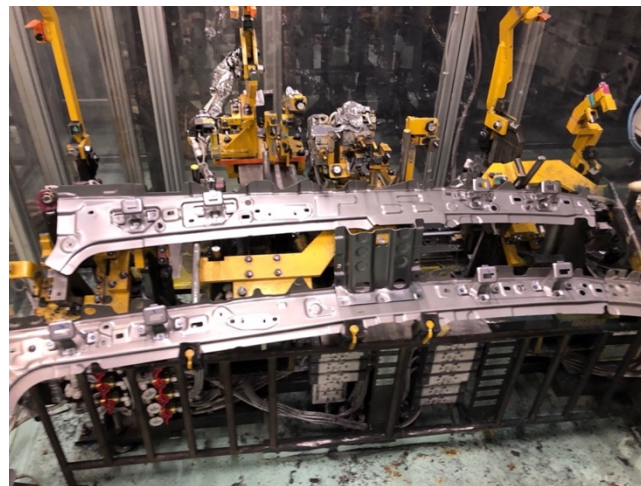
Jig for welding assembly and panel components (provided by Toyota Motor Corporation)
